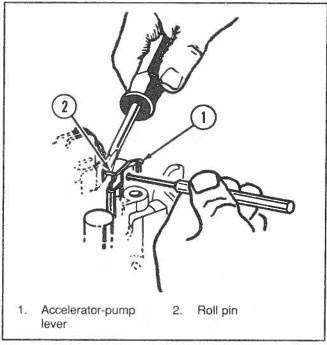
Locating Pump-Lever Rod And Roll Pin
